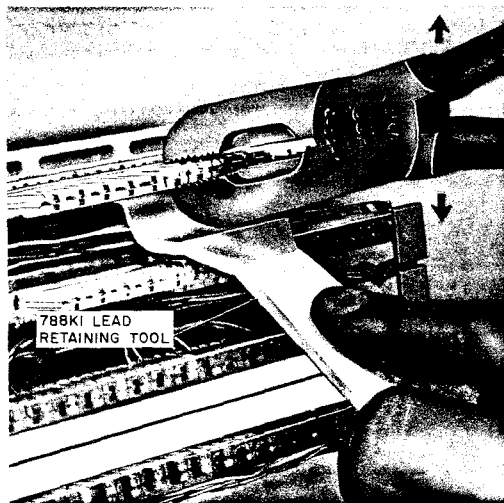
Removing Connecting Block While Holding Cable Conductors in Place With 788K Lead Retention Tool
